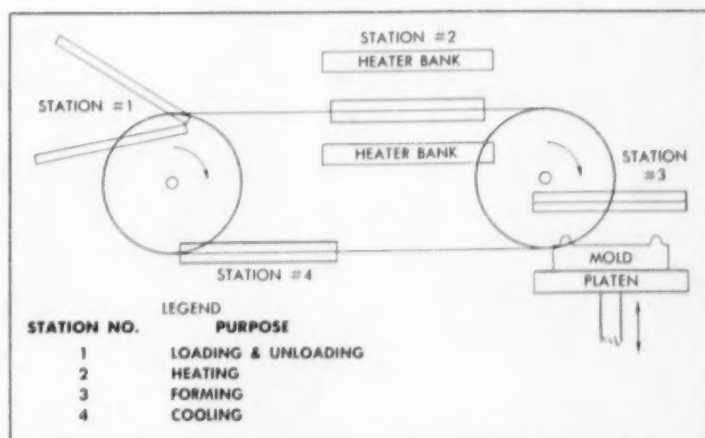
Schematic side view of four-station machine. Note that this machine is designed so that both sides of sheet are heated
